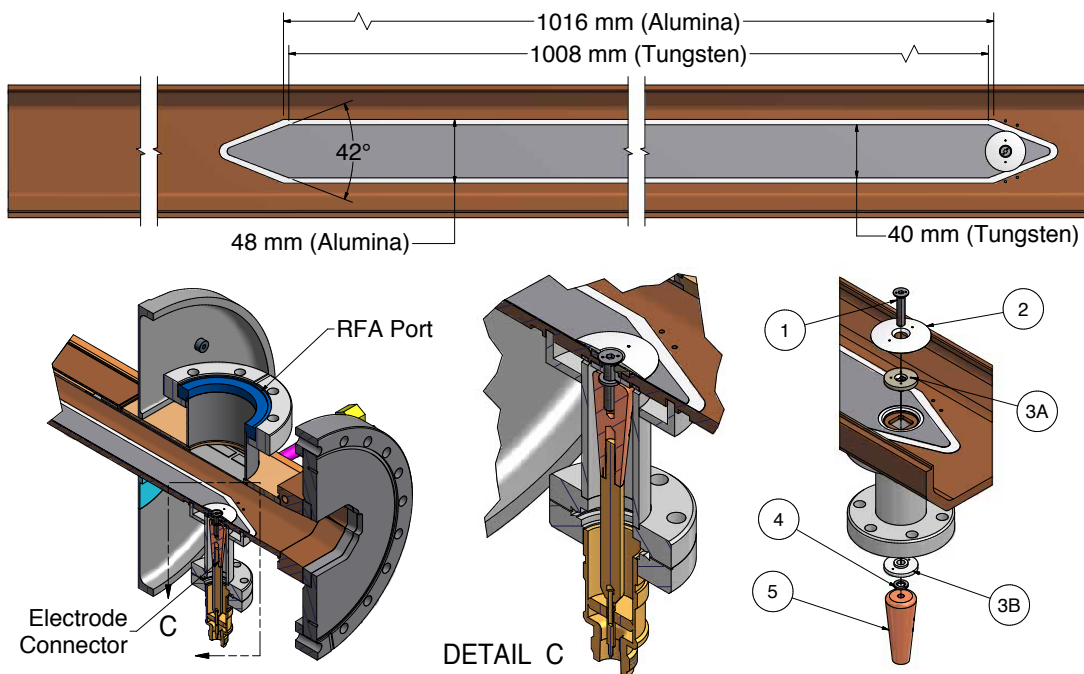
SCW RFA beam pipe with clearing electrode assembly. Top: sectional view and clearing electrode as seen from the top. Bottom left: sectional view of the clearing electrode and the HV input port. Bottom middle: detail of HV coupling port. Bottom right: exploded view of HV port; electrical contact is made with a vented screw (1), an aluminum alloy button (2), insulation spacer made of PEEK (3A, 3B), a stainless steel spring washer (4), and a tapered copper pin (5).
